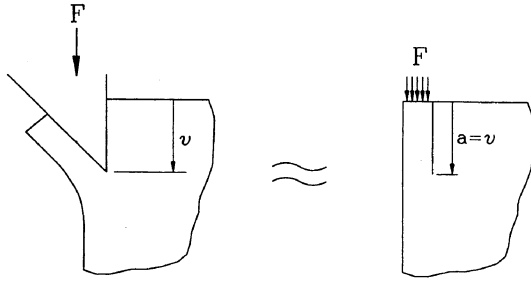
Idealization of geometry/load of a specimen being machined by a tip of the cutting tool
